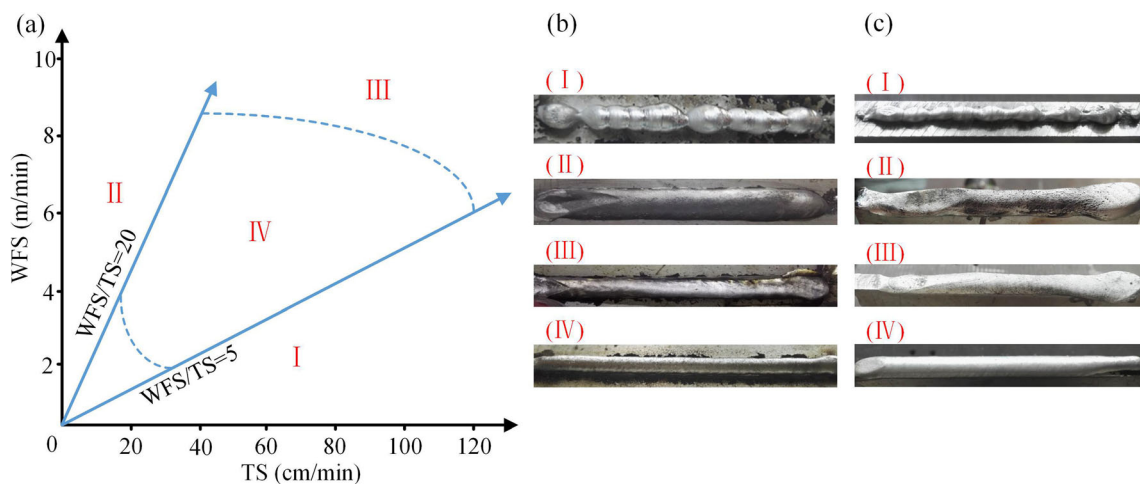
a Process parameter area of various forming appearances; b forming appearances at the lower layer (group I); c forming appearances at the upper layer (group II)
